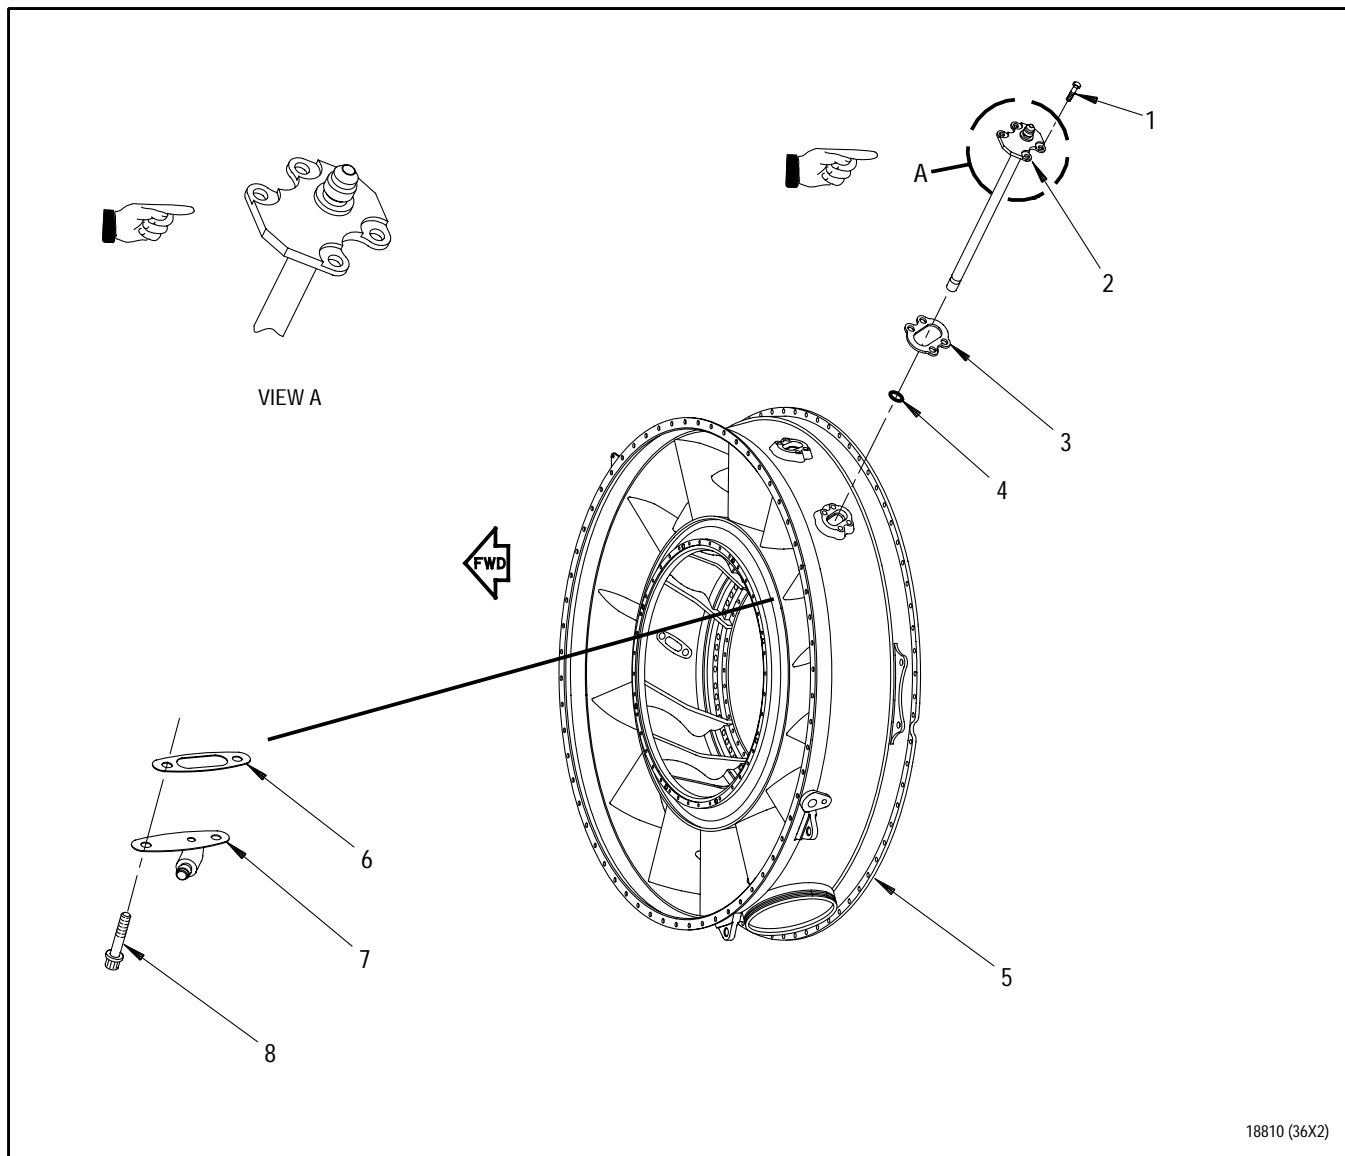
No. 2 and 3 Bearing Internal Pressure Tube - Installation
